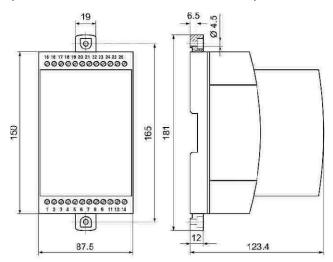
RISH ${\it Ducer}$ M40 in housing T24 screw hole mounting brackets pulled out.
